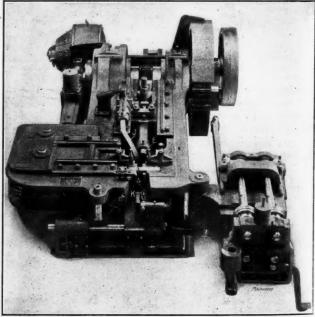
Continuous-motion Bolt and Rivet Header built by the Ajax Mfg. Co., Cleveland, equipped with Roll Feed Attachment
